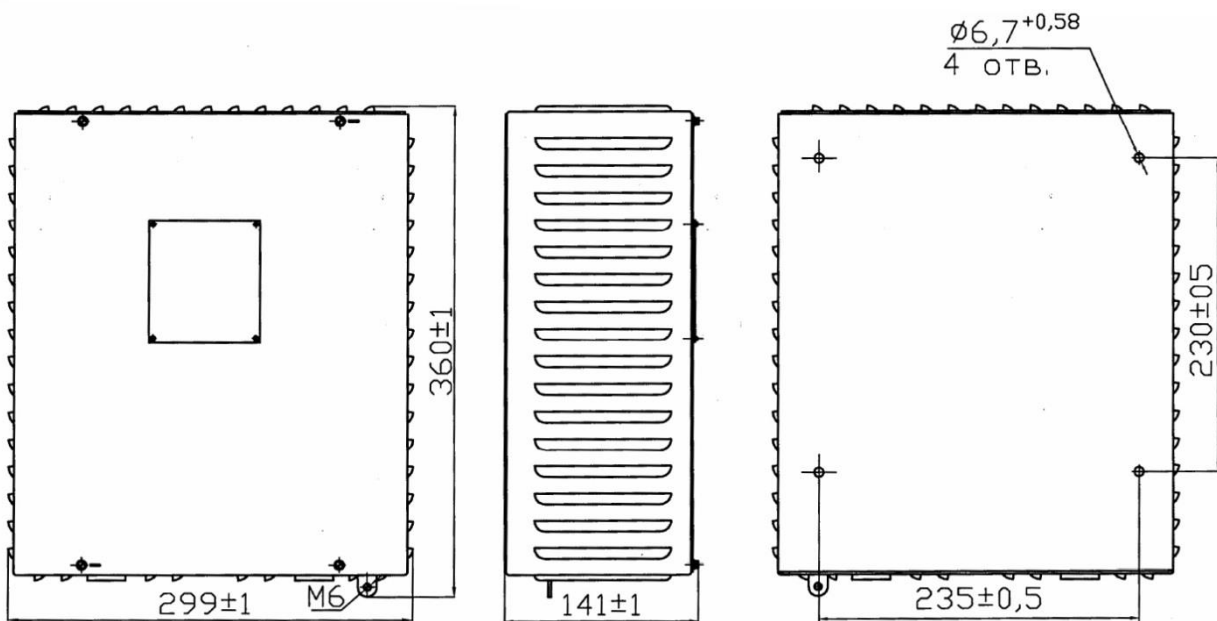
Overall and mounting dimensions of PSU 3000/65 V in the protection enclosure for the meter rated at 3000 V, 300 A (connected as a “sink” device)
